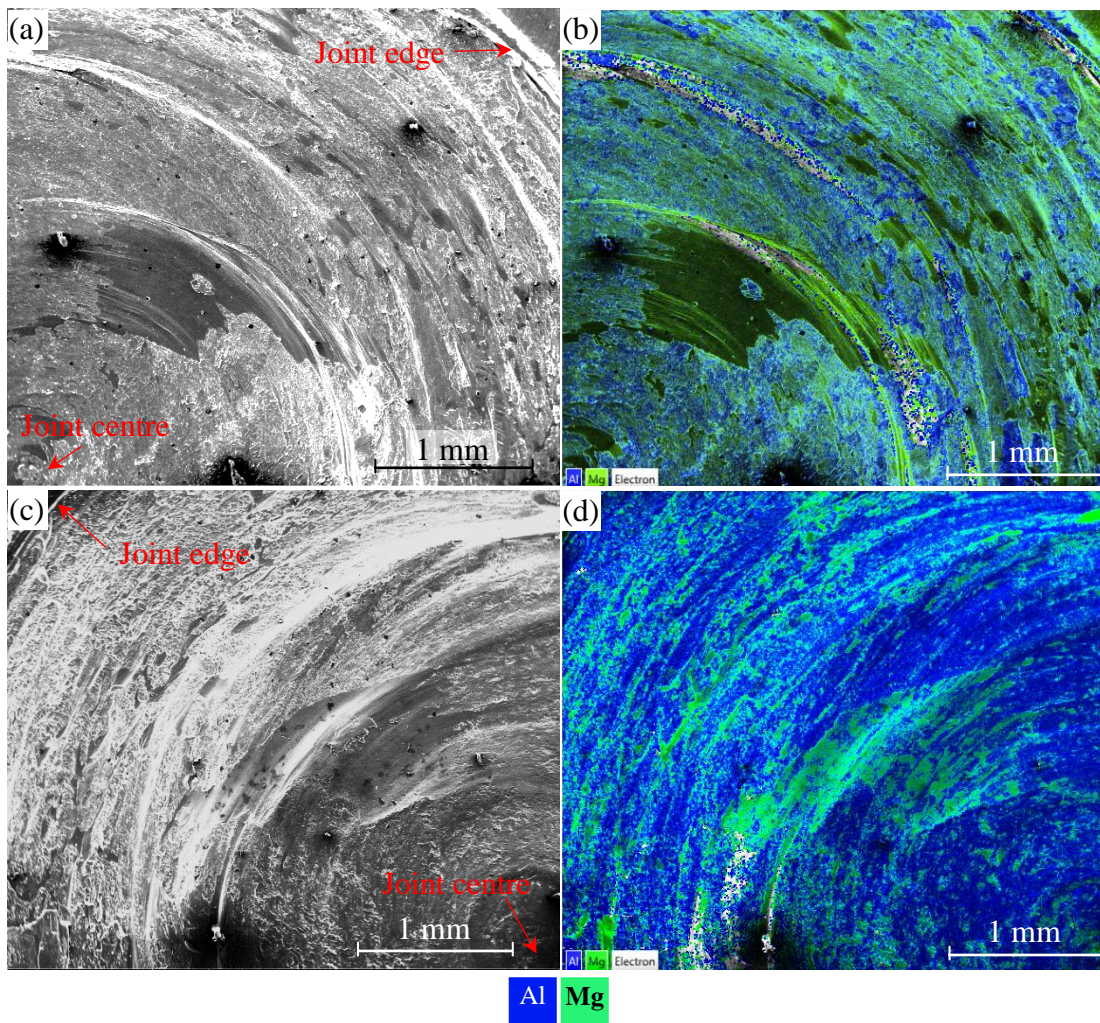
Backscattered SEM micrographs and EDS maps of a quarter of both halves of the fractured Mg to Al welds, produced using the modified RFSSW process with welding parameters of a 2500 rpm tool rotation rate, 1.0 mm sleeve plunge depth, and 1.0 s total welding time: (a) SEM micrograph of the upper sheet (Mg); (b) EDS map of the upper sheet (Mg); (c) SEM micrograph of the lower sheet (Al); (d) EDS map of the lower sheet (Al).
